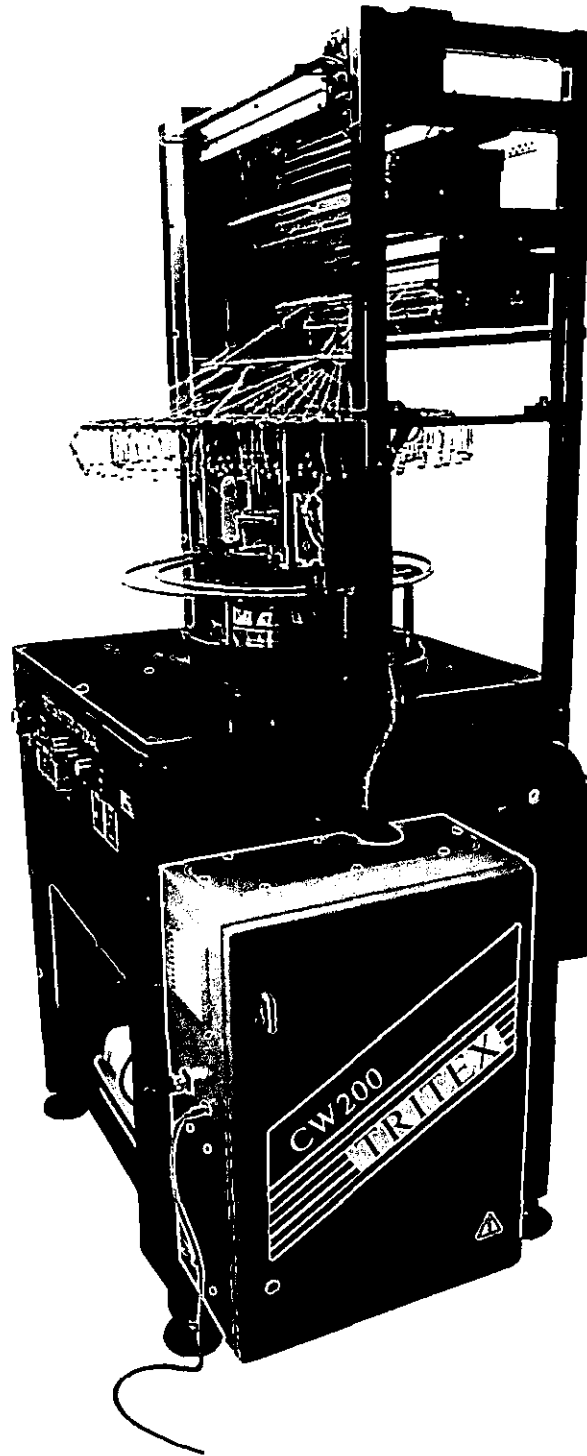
Electronically Controlled Circular Warp Knitting Machine
